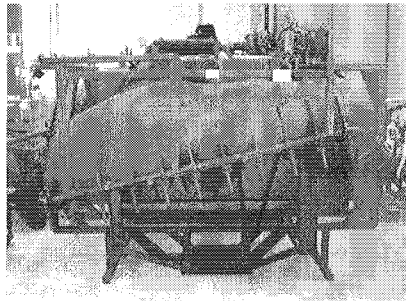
Mould for California 90 PE 2000 (Main Tank)
